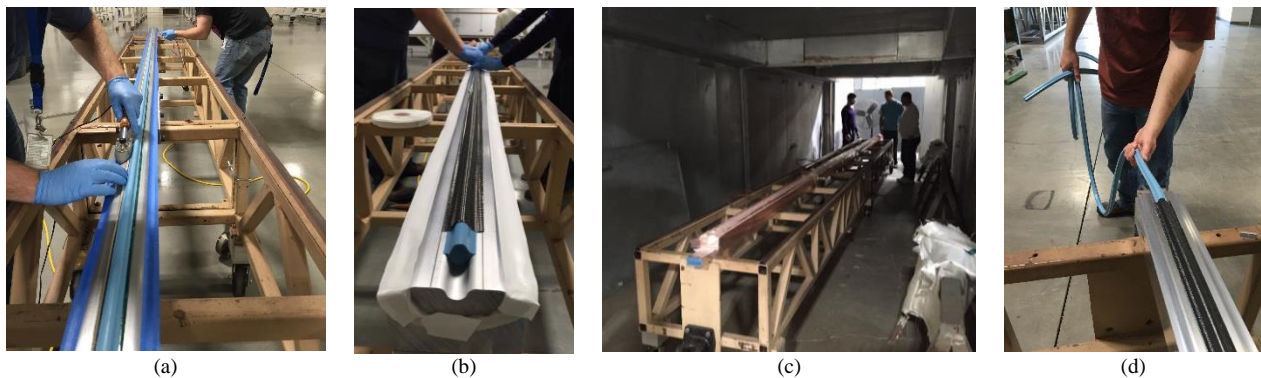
Summary of the steps of the boom manufacturing process. (a) Lay down the bottom boom half on top of the female tool using the edge scribe lines for reference. Lay down the silicone plug. Add adhesive strips to the web areas. (b) Lay-down the top boom half pressing it against the silicone plug to conform to its shape. Add a top release film, breather ply and vacuum bag. Apply vacuum and check for leaks. (c) Move the mold into the oven and proceed with the curing cycle. (d) Once processed, release the boom from the female mold and silicone plug. Clean it and sand down the edges.
